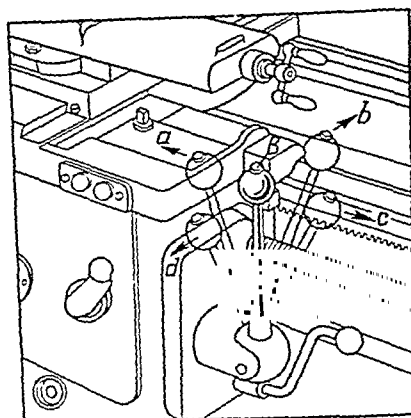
Feed engagement lever of the model 1K62 engine lathe
